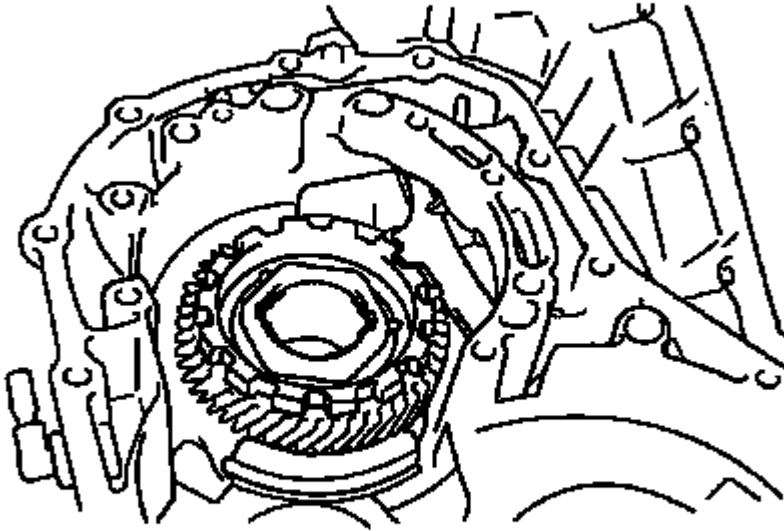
Counter Drive Gear & Parking Lock Pawl
